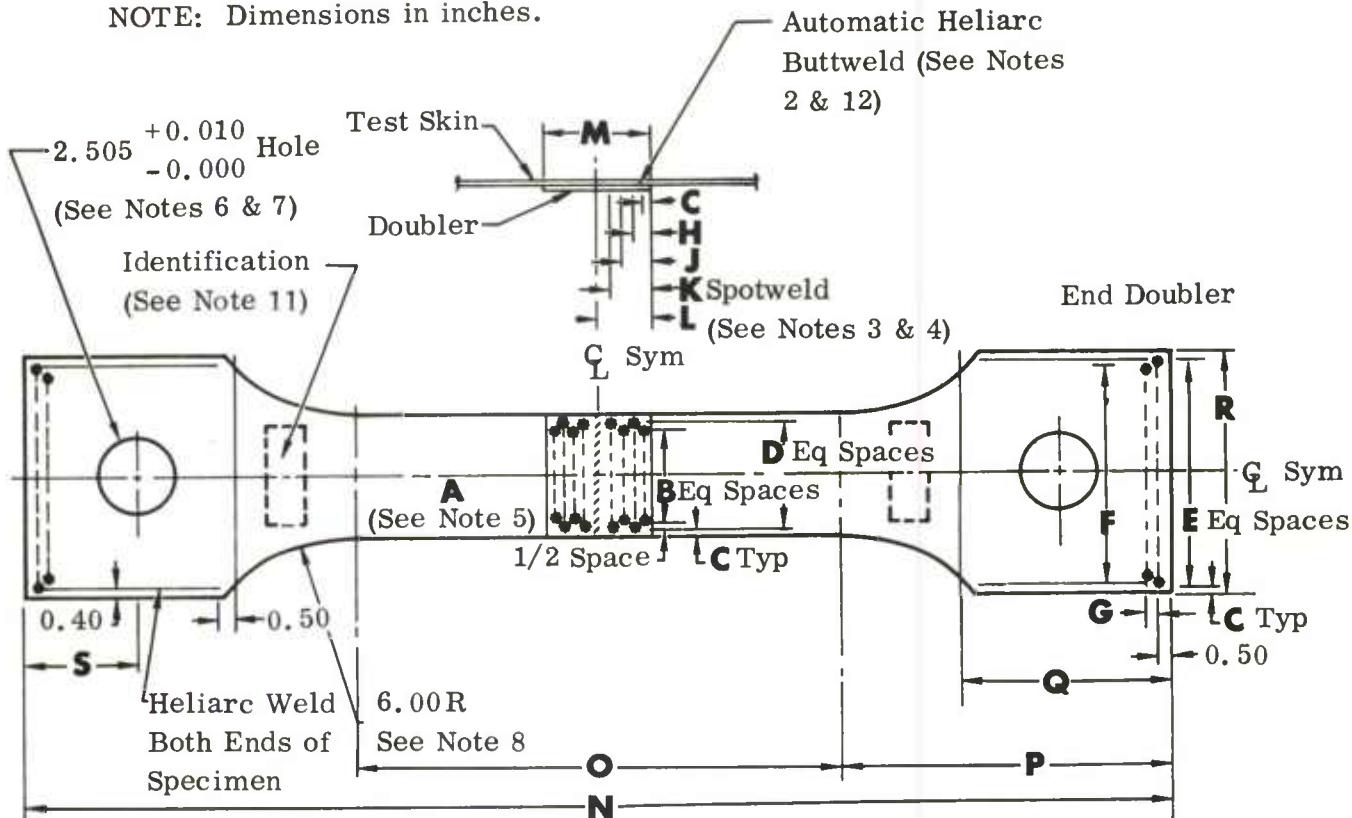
Spot Welded Tension and Shear Specimens
